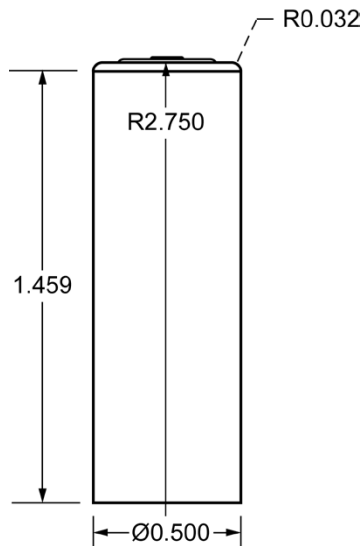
Sample Small Panel Projectile (length and diameter vary depending on test specimen thickness and material. Dimensions in inches.)
